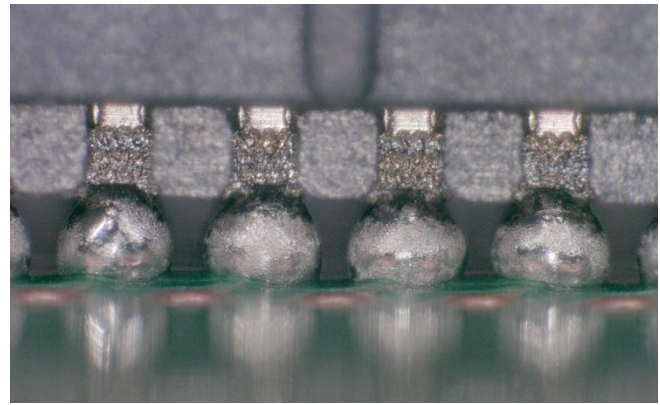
Solder Joint Formation – with SAC305 Collapsible Solder Balls (Soldered with SAC305 Solder Paste)
